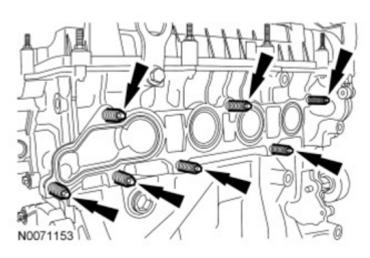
Locating Exhaust Manifold Studs Courtesy of FORD MOTOR CO.
